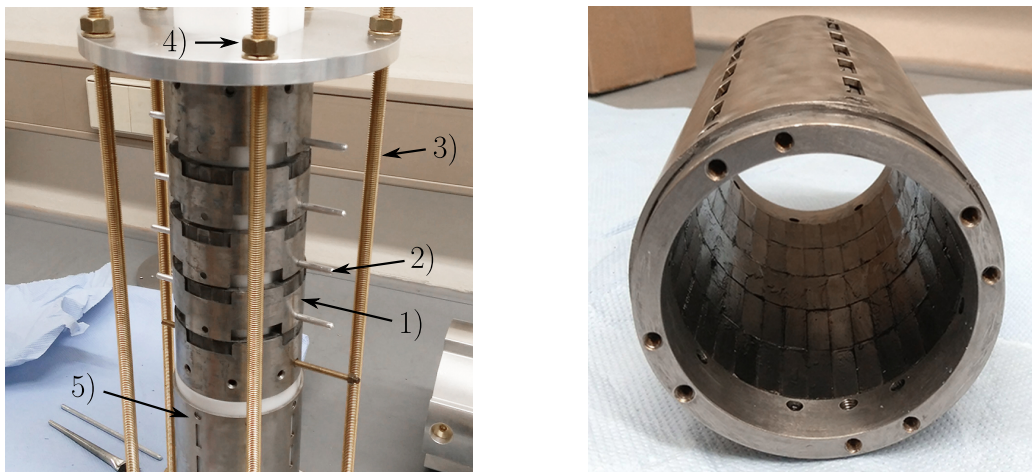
Final steps of the octupole assembly. Left: Octupole rings (1) stacked on top of each other onto an assembly aid with rods (2) preventing them from rotation. Two metal plates, connected by threaded rods (3) pushed the rings together when the nuts at the top (4) were tightened. As soon as the cutouts of the rings engaged, the rods were removed. Finally, the holding cylinder (5) was pulled upwards and bolted with the end rings. Right: The finished compensation octupole.
